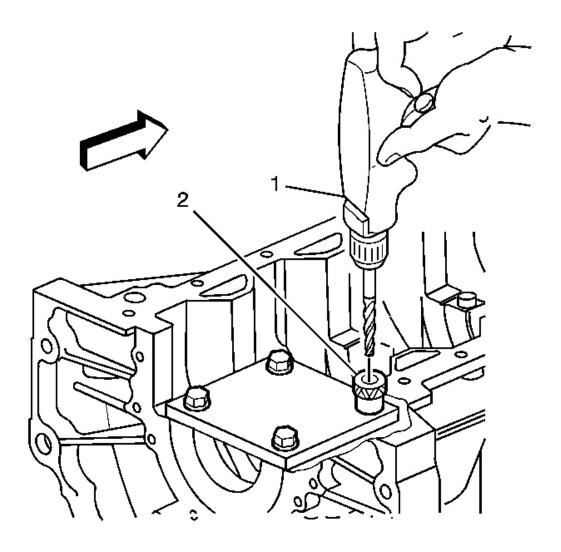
View Of Alignment Pin & Fixture Retaining Bolts - Crankshaft Main Bolt Hole Thread Repair
